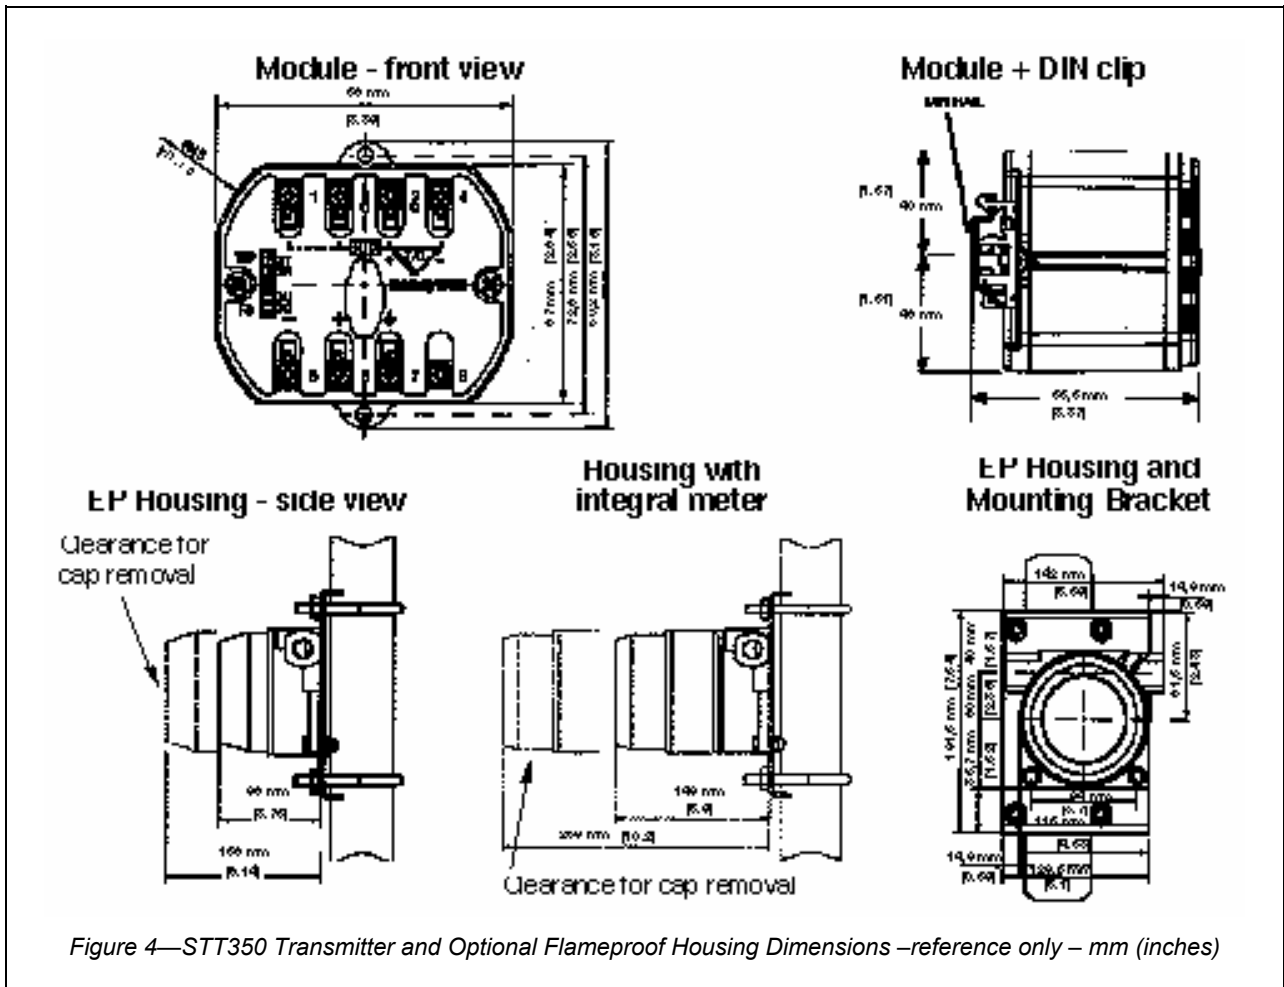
STT350 Transmitter and Optional Flameproof Housing Dimensions –reference only – mm (inches)
